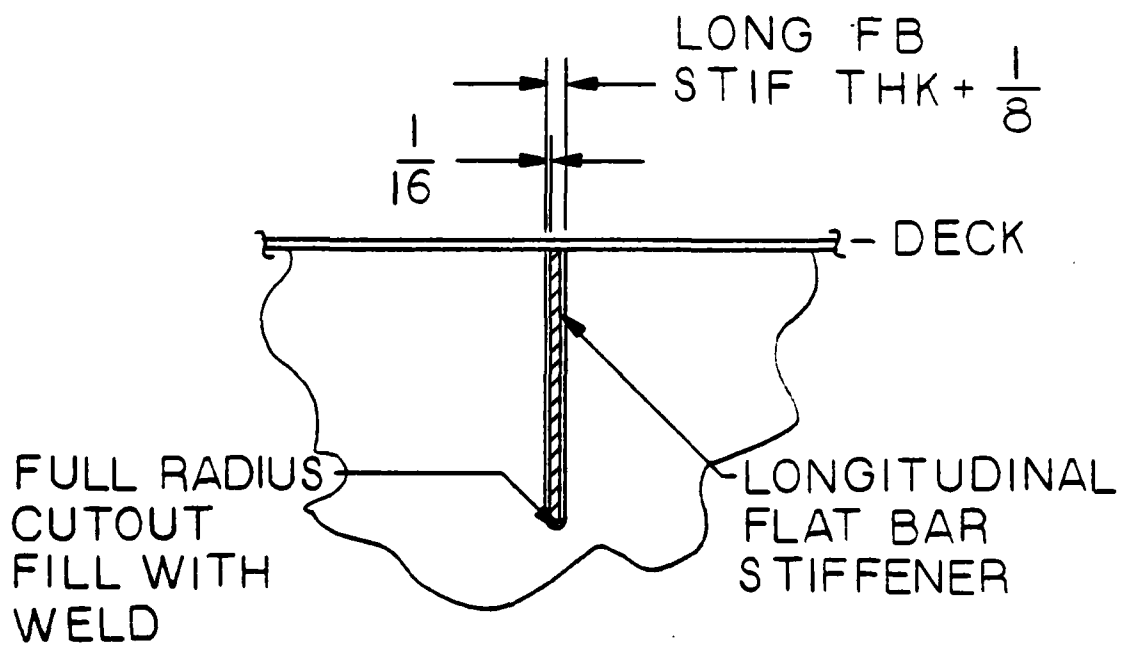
Typical Deck Flatbar Penetration through Framing Member
